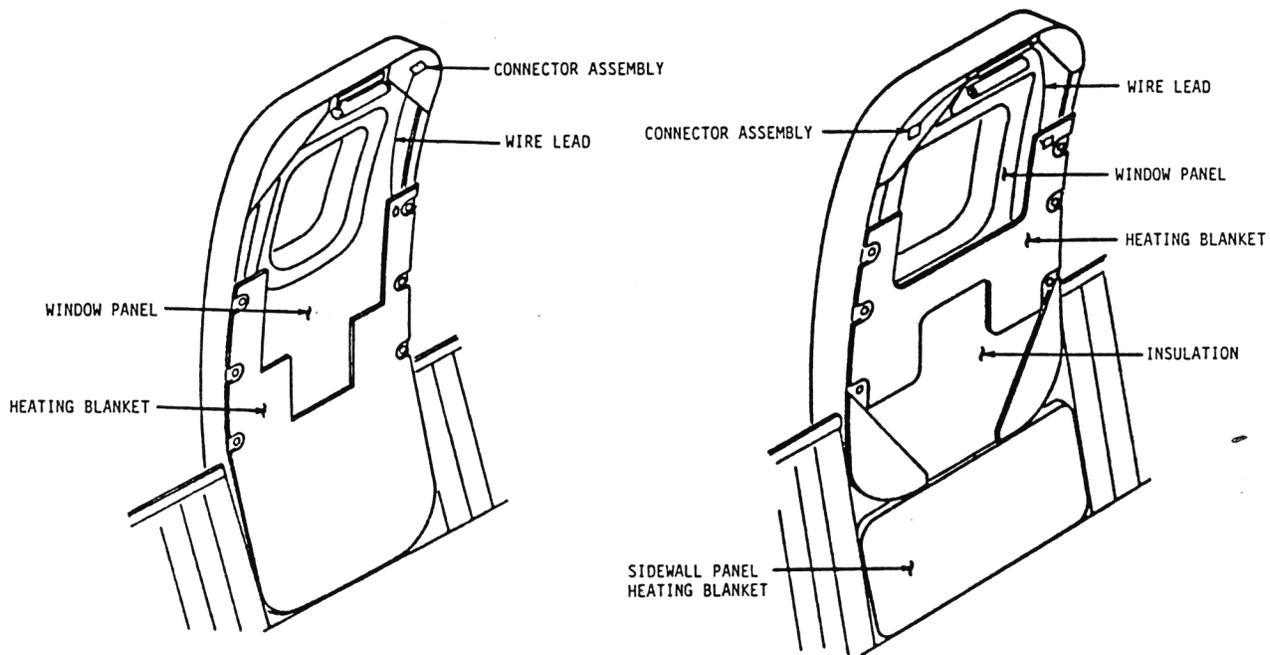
BOEING 707,720 ESCAPE HATCH HEATING BLANKET
